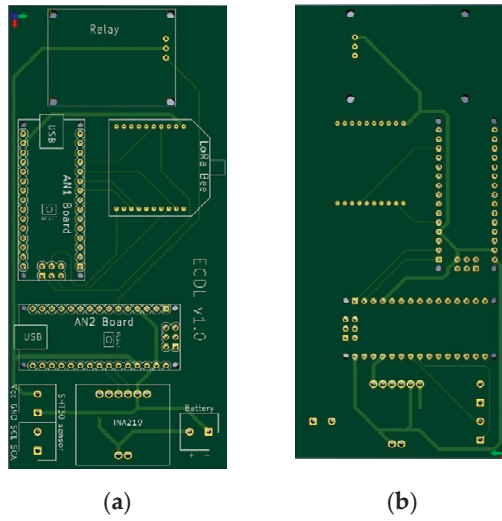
PCB of the ECDL with battery power supply: (a) front side and (b) back side.
